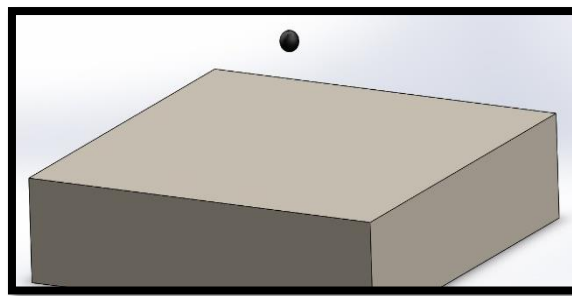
3D model for abrasive particle and workpiece (Isometric)
